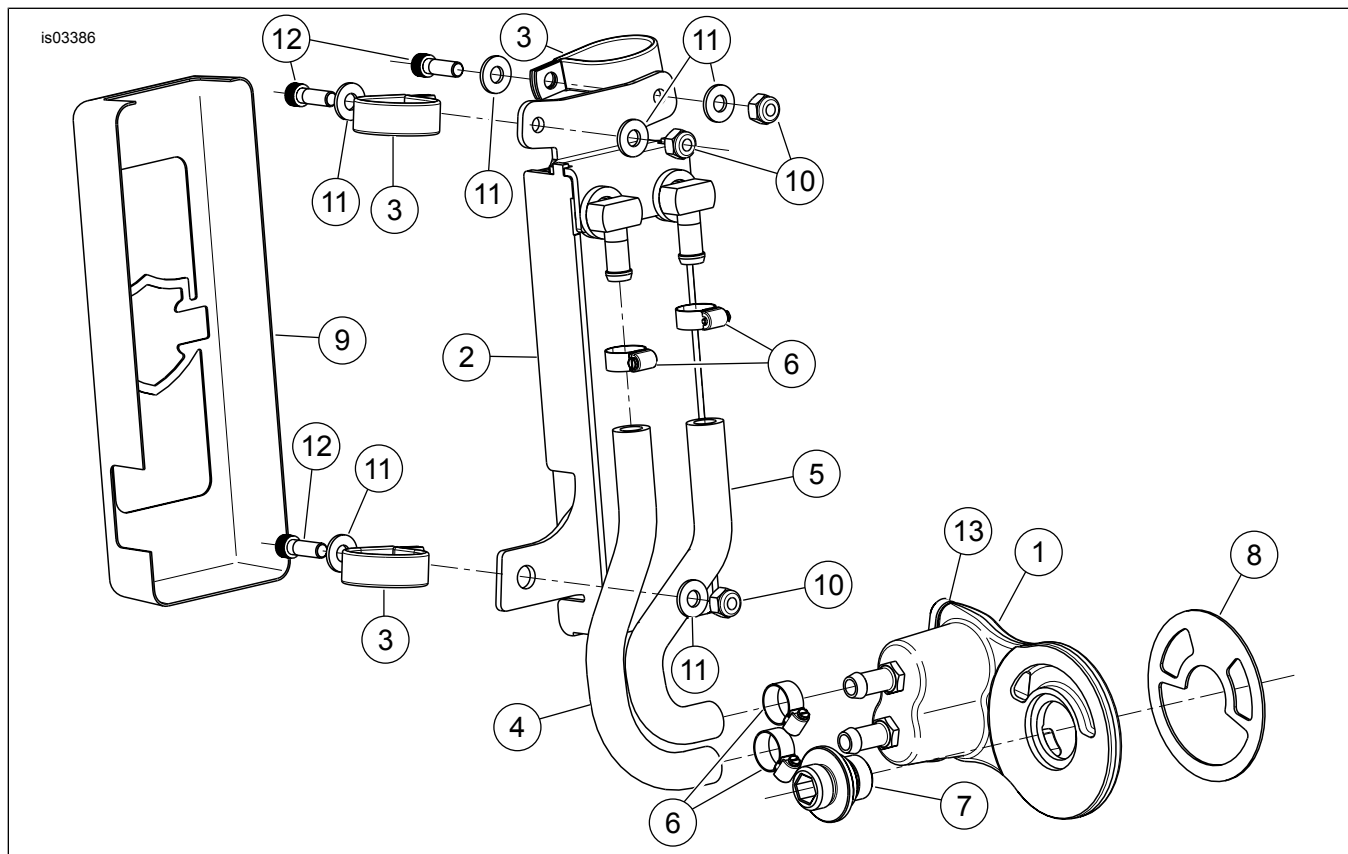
Service Parts for Softail Oil Cooler Kit with Chrome Oil Cooler Cover
